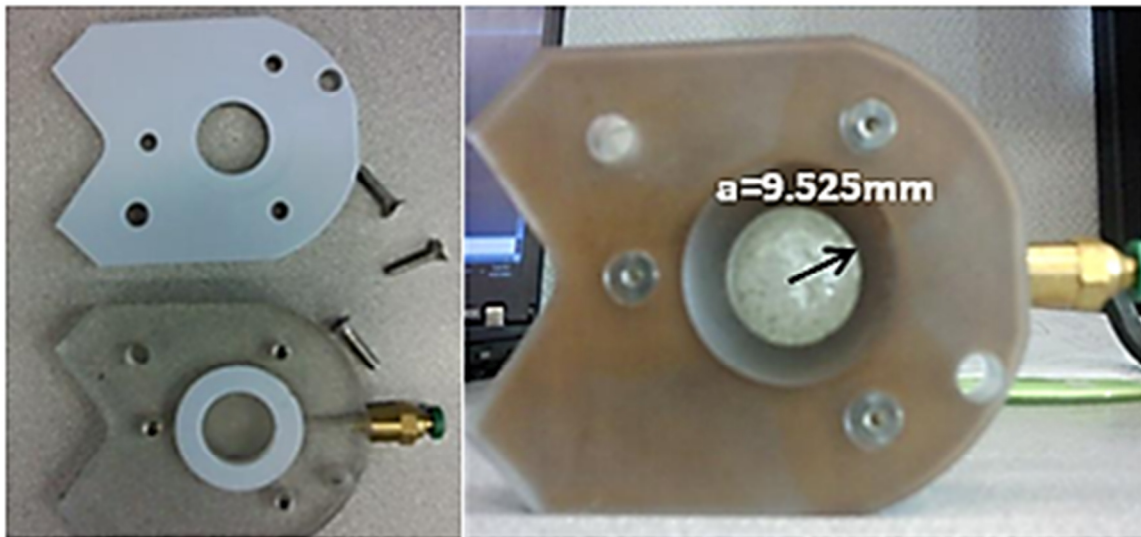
Unassembled (Left) and assembled (Right) blister fixture for use with the DIC
